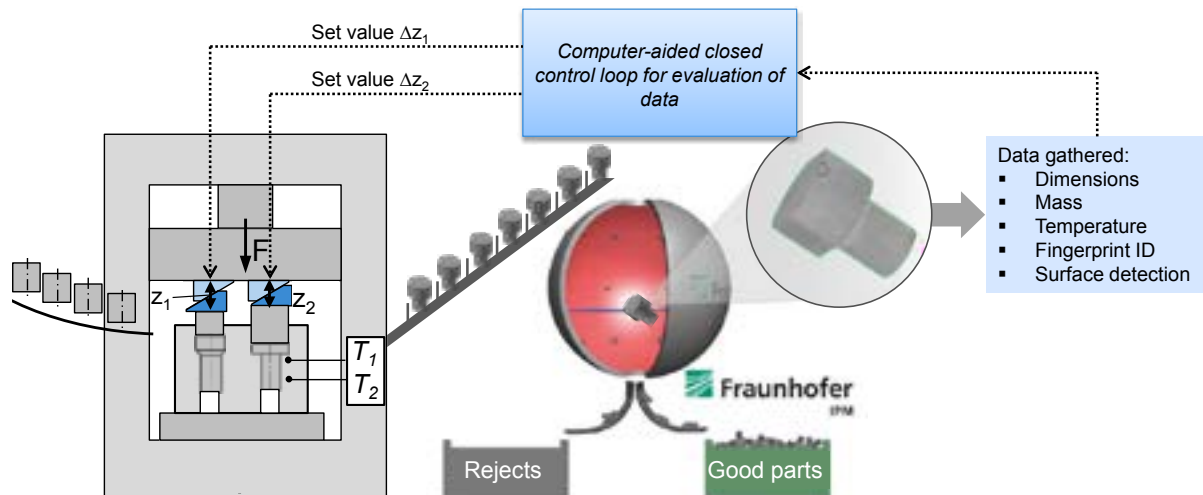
Principle concept for the combined use of inspection sphere observation of workpieces and wedge adjustment control
